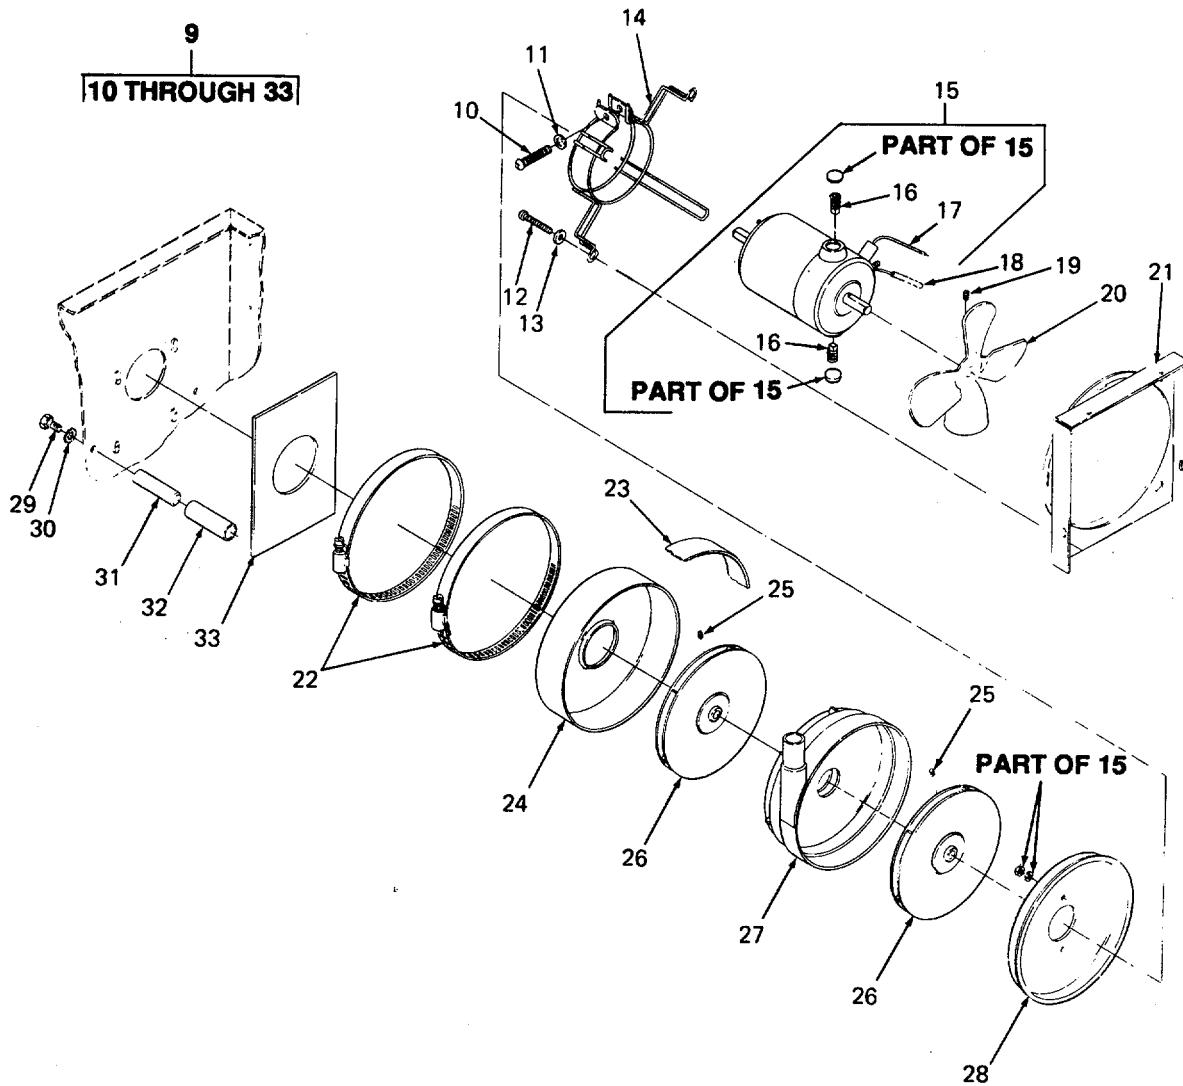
Burner Head, Blower/Motor/Vent Assembly, and Heat Exchanger (Sheet 2)
